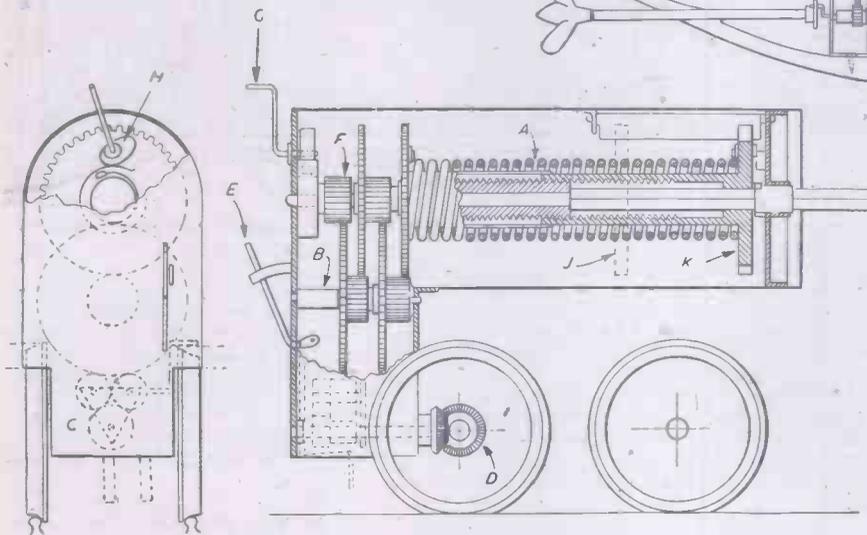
New spring-wire motor with reverse gear and speed control.
